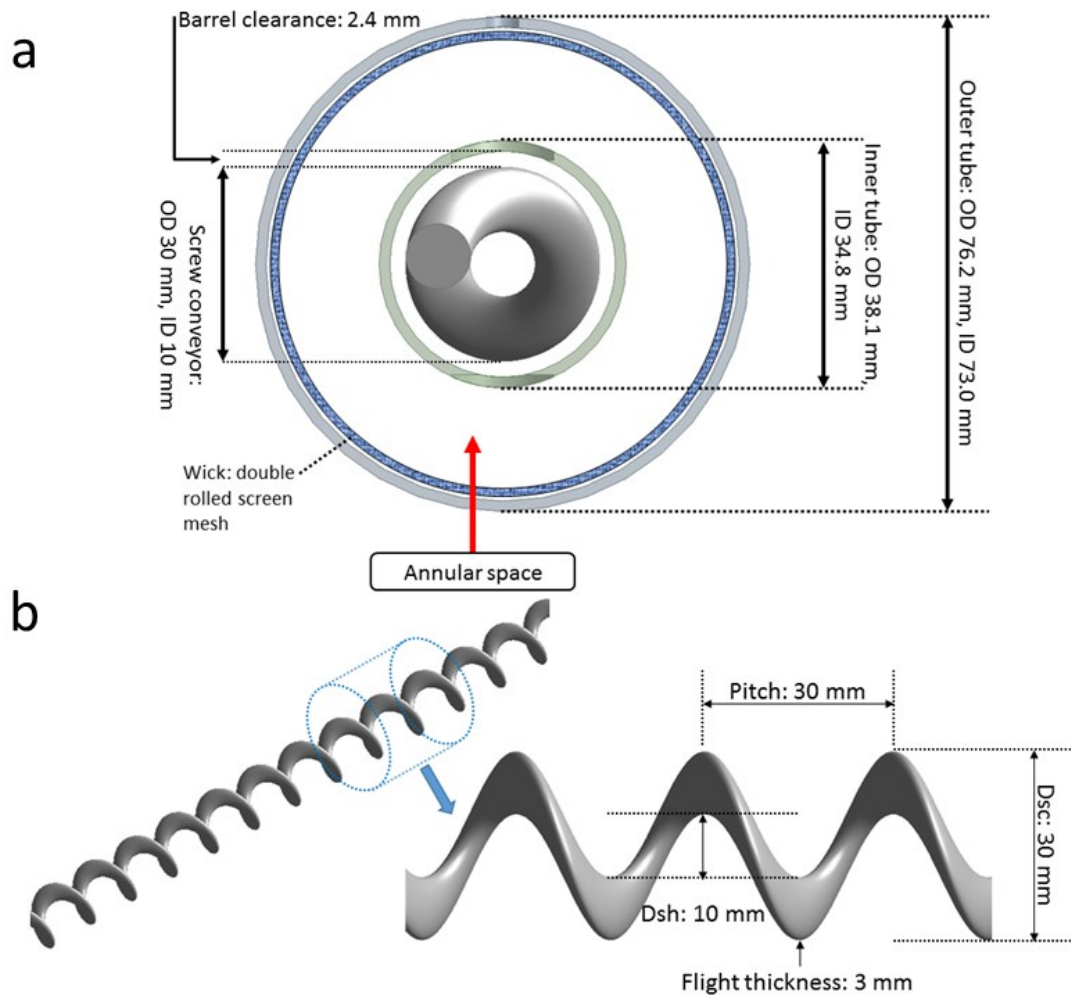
The key dimensions of the HPSD: (a) the cross-section and (b) a close up of the (hollowed) screw conveyor. Note:  $D_{sc}$  = screw outer diameter and  $D_{sh}$  = hollow shaft diameter.
